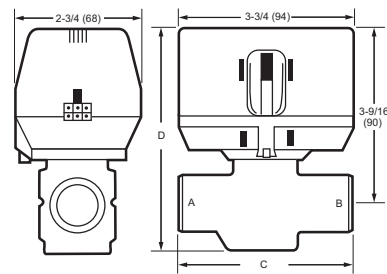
2-Way nominal dimensions in inches and millimeters.
